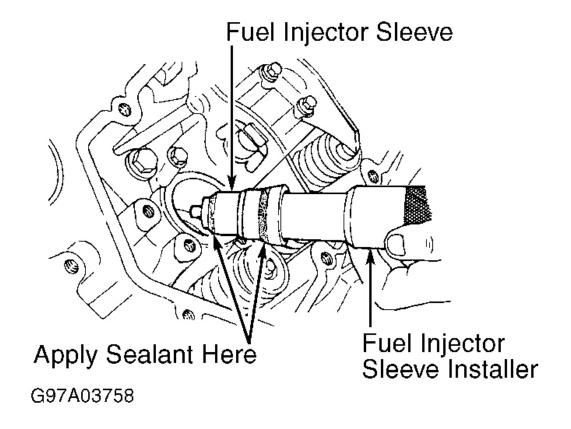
Applying Sealant On Fuel Injector Sleeve Courtesy of FORD MOTOR CO.
